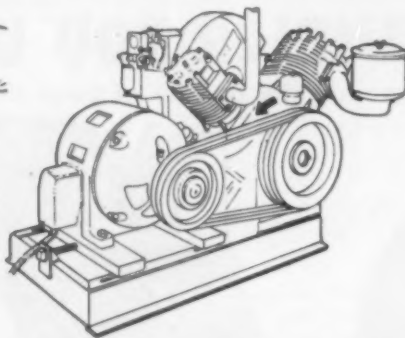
Arrow cast on most air compressors shows right direction of rotation. This is important. If machine rotates in reverse direction, oil pump fails and machine burns up very fast
